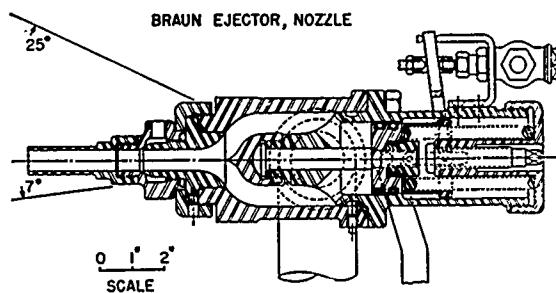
Cutaway of Braun ejector nozzle showing pintle valve in open position.
